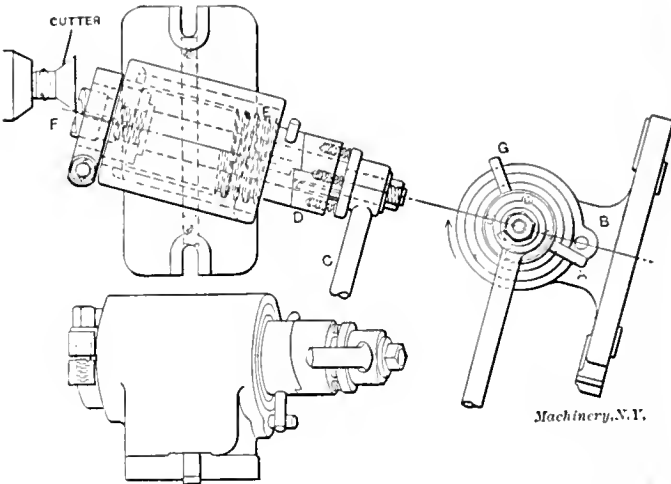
Plan and Elevations of the Clutch Milling Fixture shown in Fig. 17
